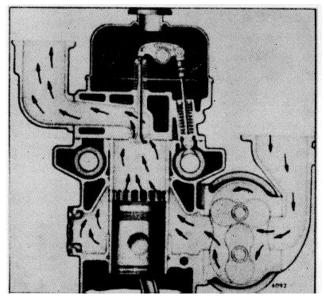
Air Intake System Through Blower and Engine (In-line Engine)
